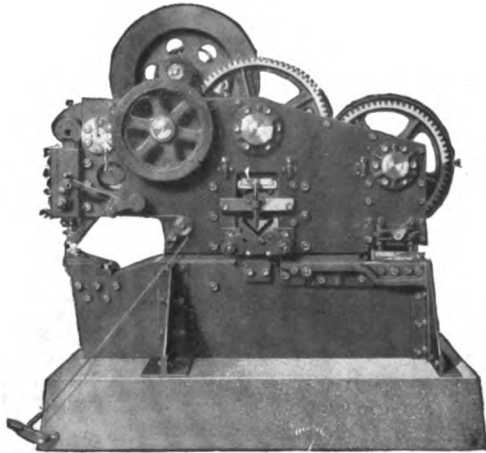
"UNIVERSAL" SLITTING SHEAR, PUNCH, AND BAR CUTTER NO. D25-U
